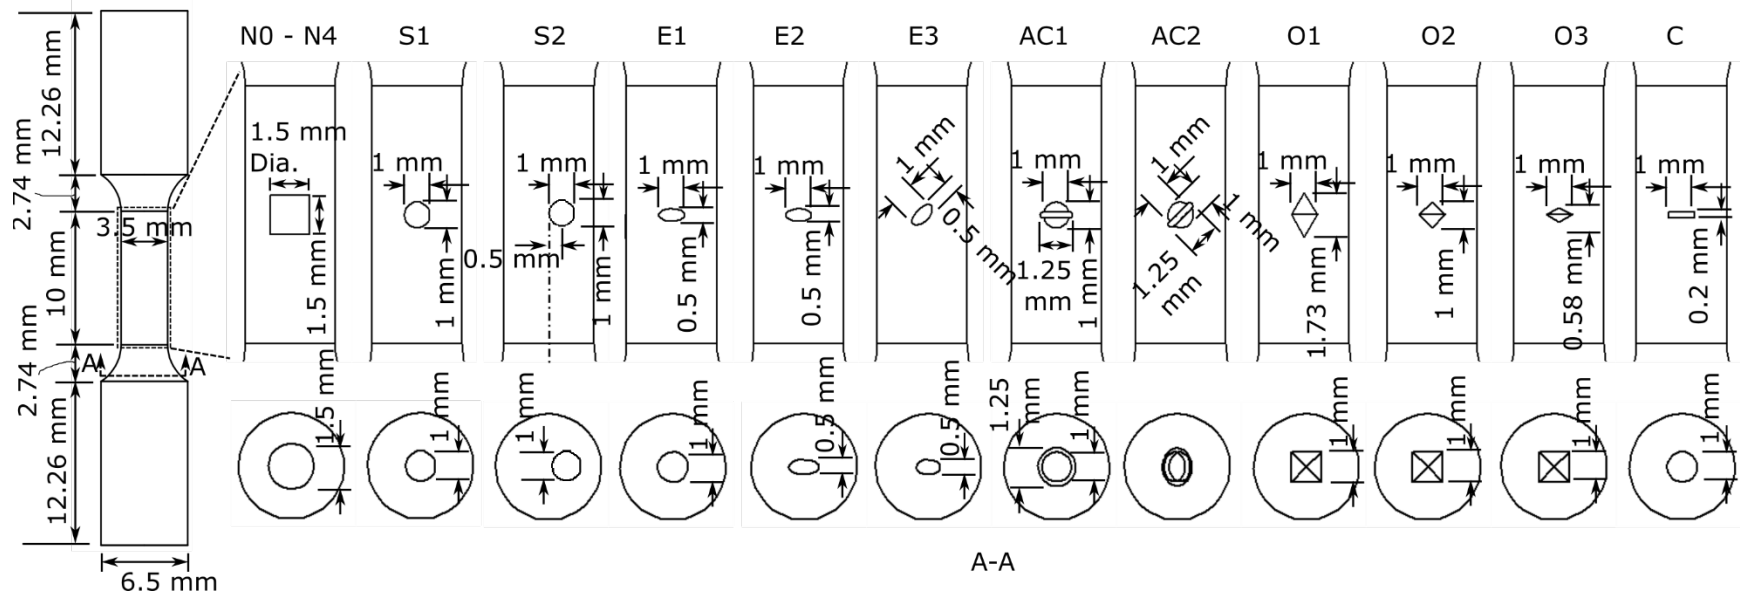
Initial AM tensile specimen build geometry and geometry of embedded defects
